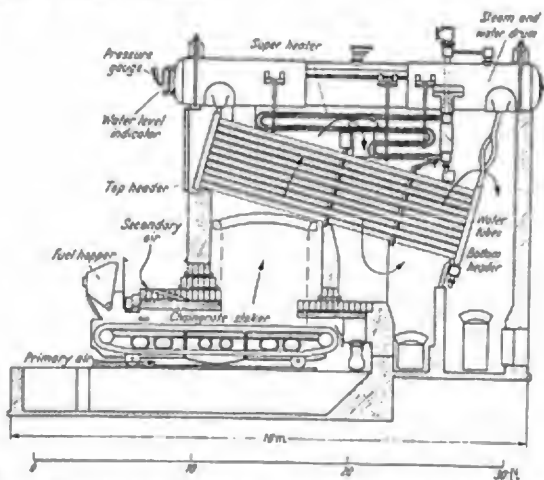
Water-tube boiler (straight tubes with sectional headers) with chain-grate stoker.
